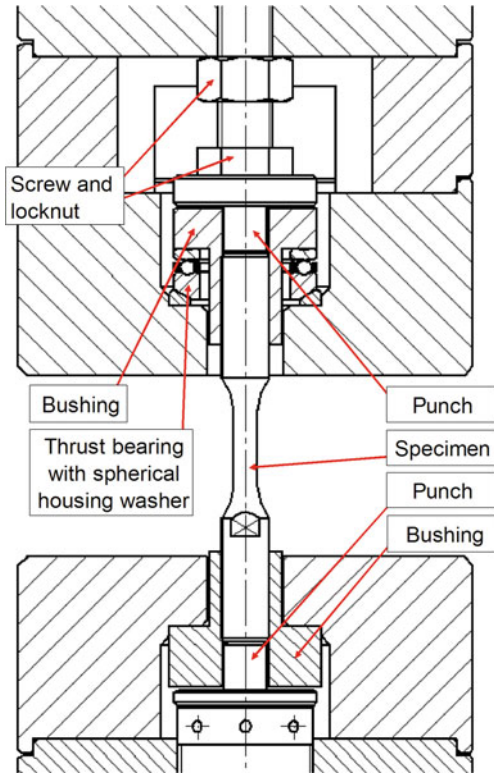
The selected solution [53], realized by thrust bearing with sphered housing washers
